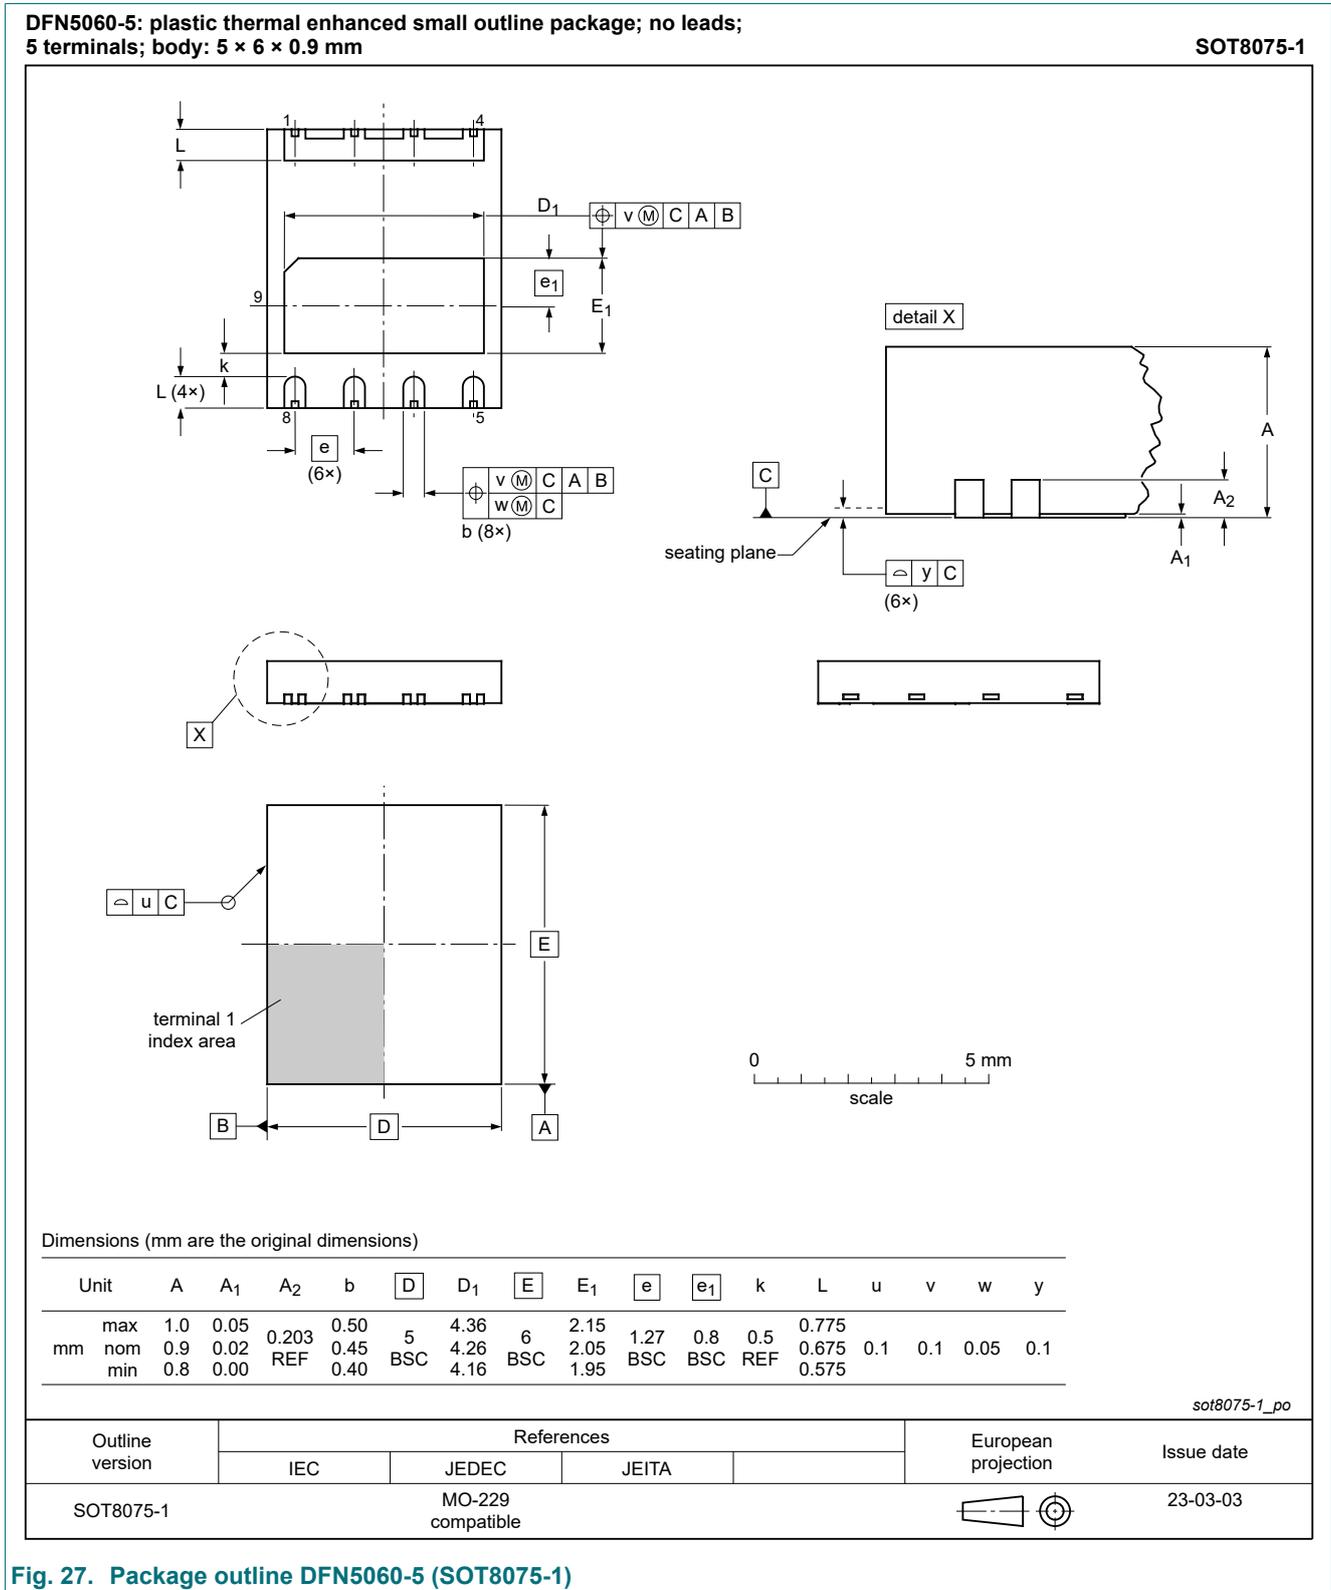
Package outline DFN5060-5 (SOT8075-1)
